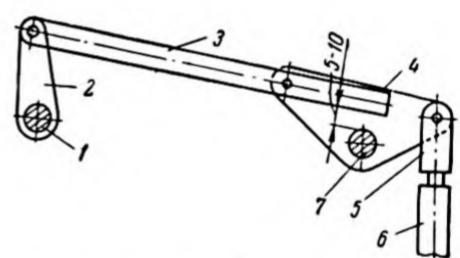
Detail of the fastening parts on upper end of currentconducting rod:
